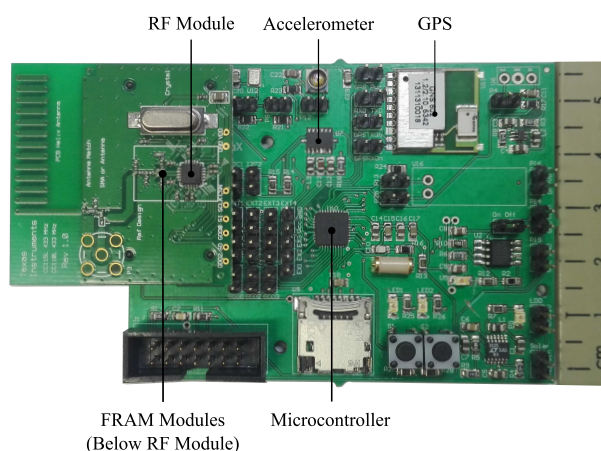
Assembled biotelemetry tag. The assembled printed circuit board (PCB) measures 100 mm x 60 mm x 12 mm and weighs 32 g.
